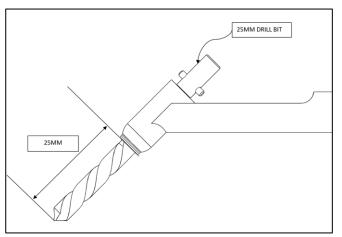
Short Side of Non-Locking Drill Guide Measurements with 25mm Drill
